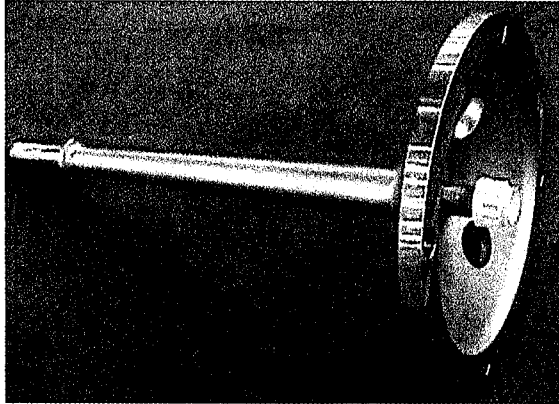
Piston Damper Rod Assembly w/Damper Adapter
